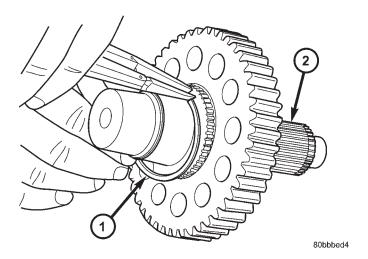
Install Front Output Shaft Drive Gear Snap-ring
